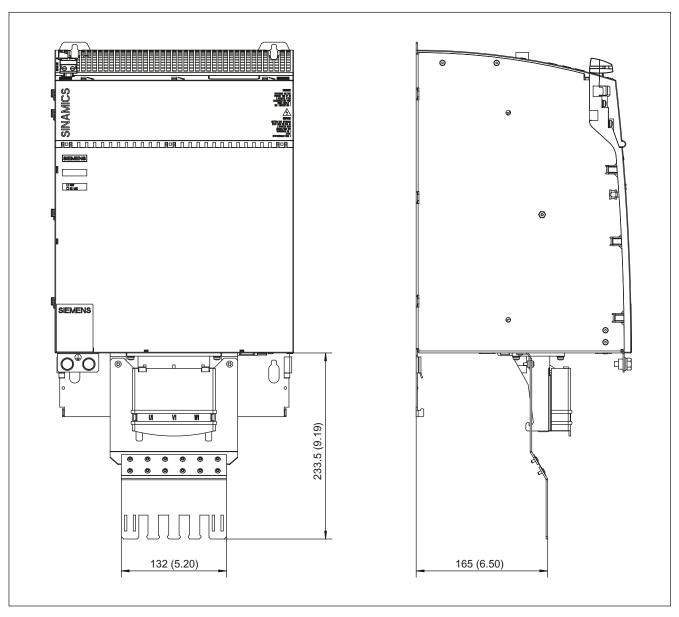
Dimension drawing of shield connecting plate on a 300 mm component with internal air cooling, all dimensions in mm and (inches)
